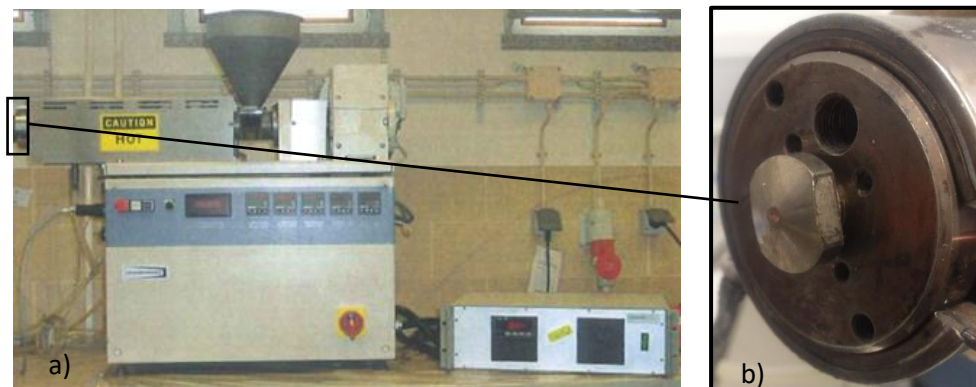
Brabender GmbH & Co. Extruder a) full set b)nozzle detail: diameter of 1.75mm
